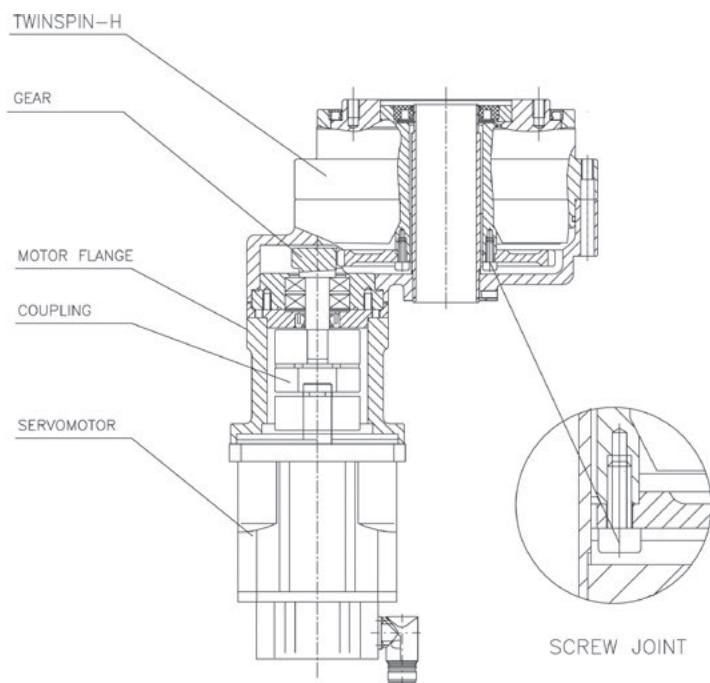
Connection of a gear wheel with the reduction gear shaft by means of a screw connection
